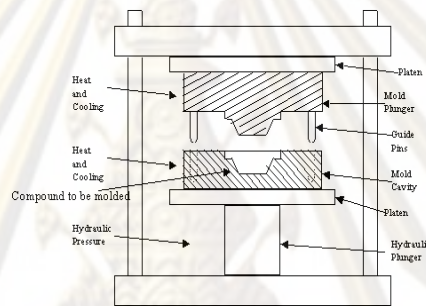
Diagram of a Compression-molding Press and Mold [28]
